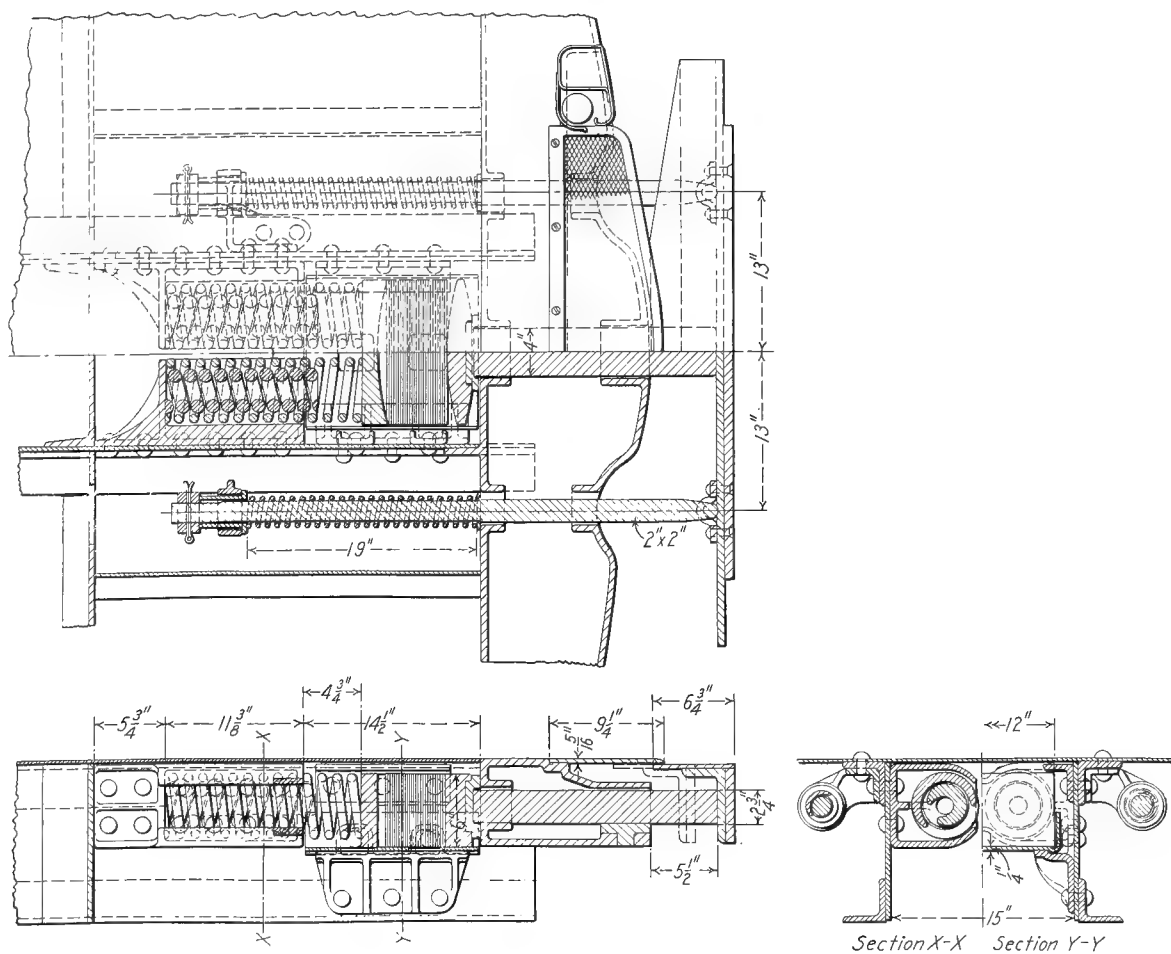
Waugh-Forsyth Buffering Device, Type D. Waugh Draft Gear Company.
